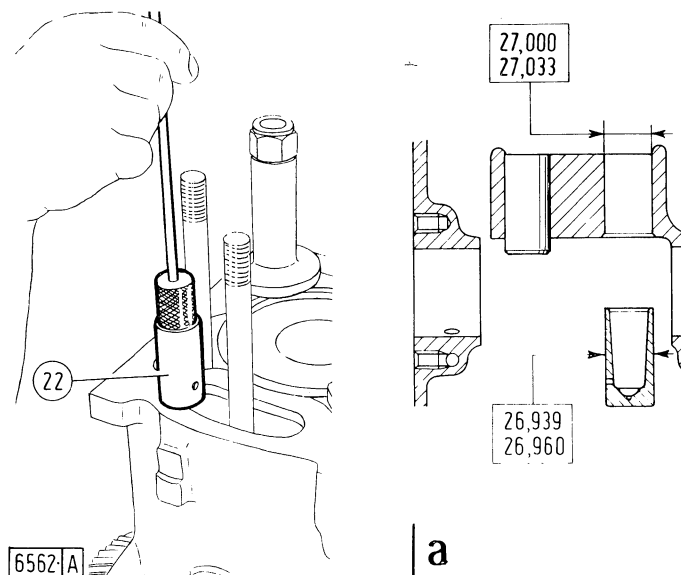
Removing (or Refitting) the Tappets Using Tool Part No. 290947
